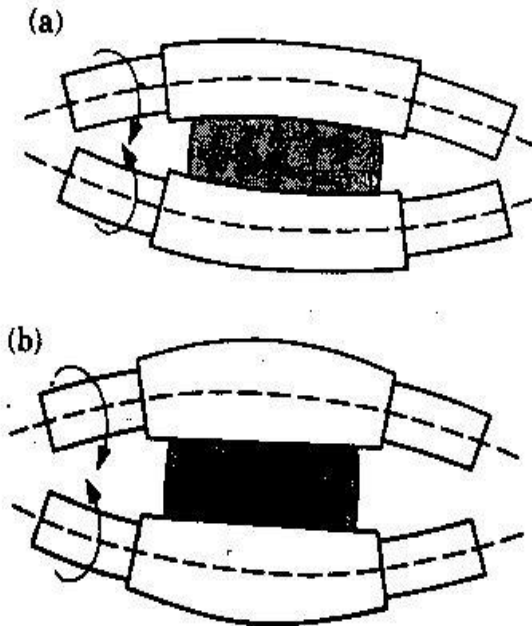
(a) Bending of straight cylindrical rolls because of the roll-separating force. (b) Bending of rolls, ground with camber, that produce a sheet of uniform thickness during rolling.
